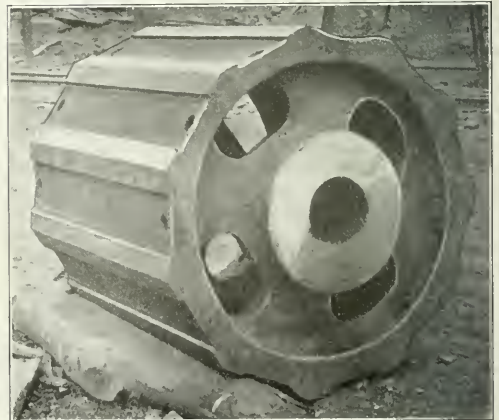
VIEW OF MAIN CRUSHER ROLL
